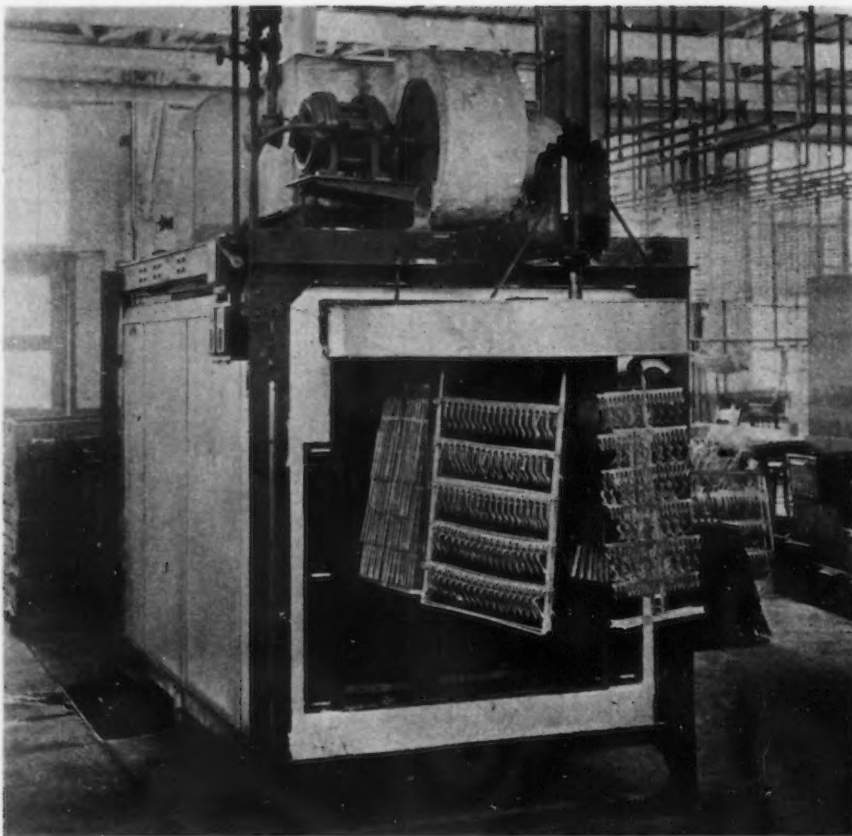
Conveyor-type dryer in a plating department for drying parts coming directly from hot rinse tanks. A hot air circulating system leaves the metal clean and dry. (Courtesy Gehnrich Oven Co.)
